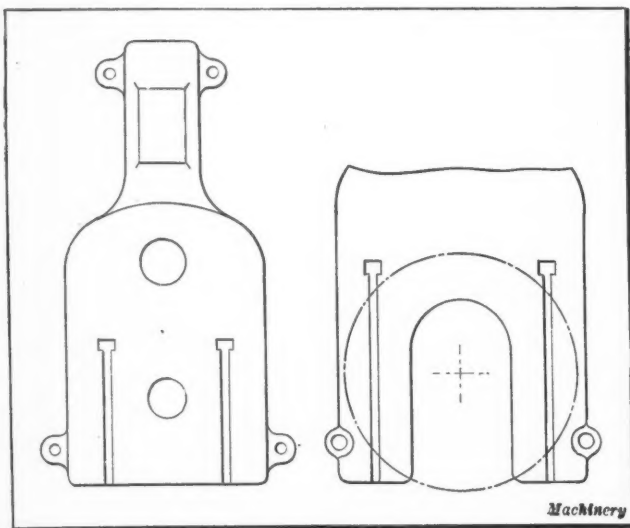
Two Suitable Styles of Base for Drilling Machines not provided with Radial Swing
